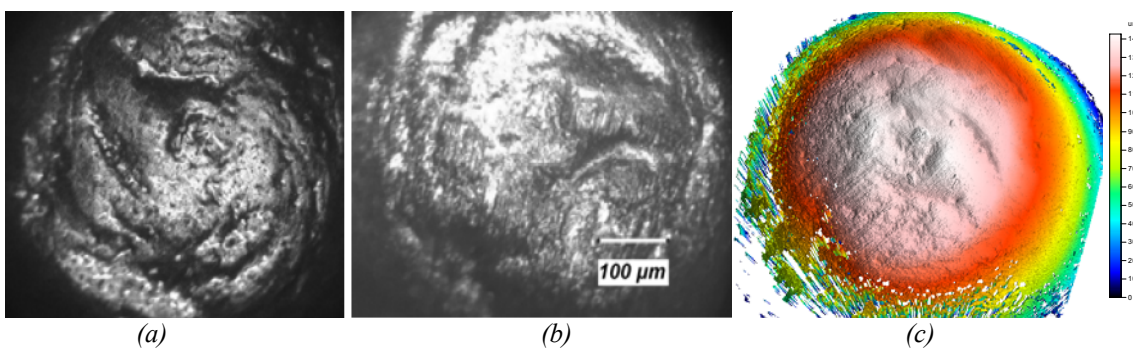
Micrographs for TD coated DRM 51 die sample (Sample # 12-1) contact surface (a) before test, (b) after test, (c) 3-d view of contact surface after the test using confocal microscopy
